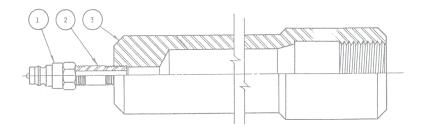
MH Cutter Test Fixture Assembly (HA102012) HP Cutter Test Fixture Assembly (HA102020)
